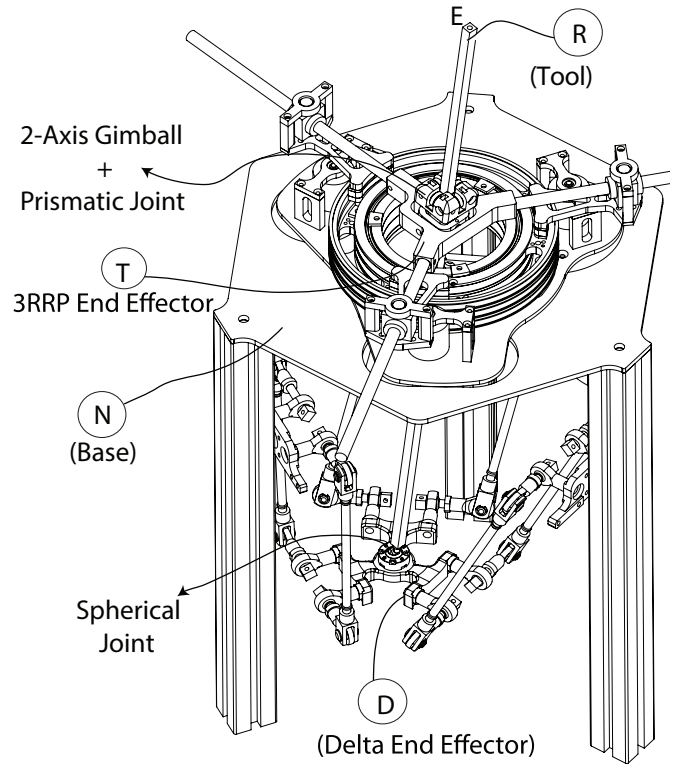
Kinematics of the device: a linear modified delta mechanism, a 3RRP planar parallel mechanism, and the tool connecting them.
